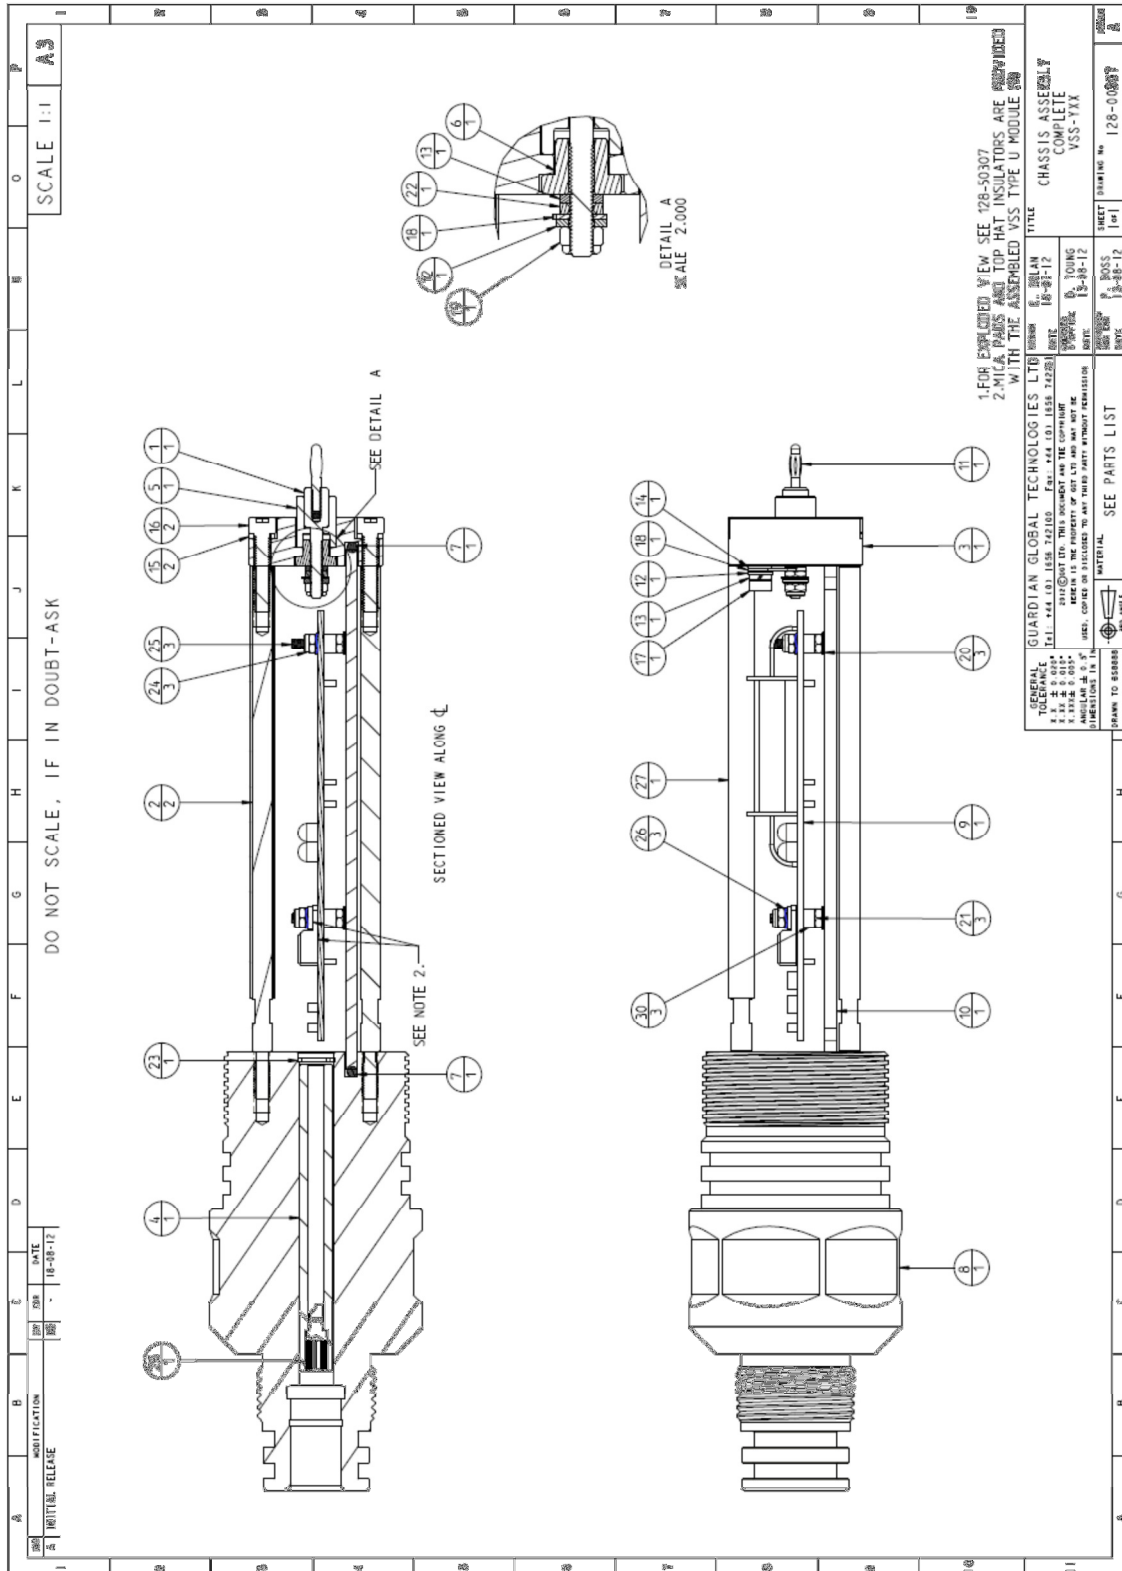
General Assembly Completed Chassis Drawing, VSS-Y – 128-00307-A
